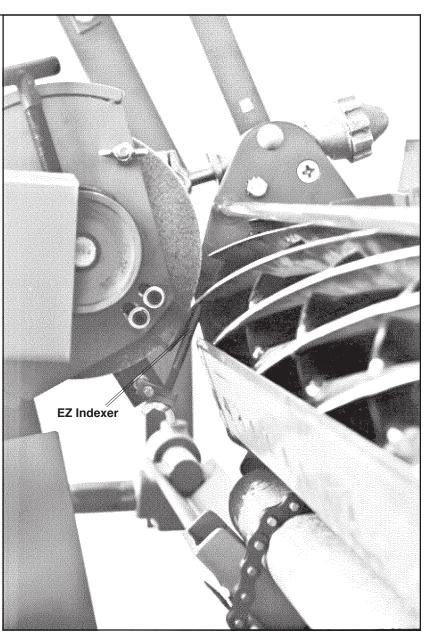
With the grinding head on the left end of the reel, carefully move it to the right and align a reel blade between the finger point and the grinding wheel.
